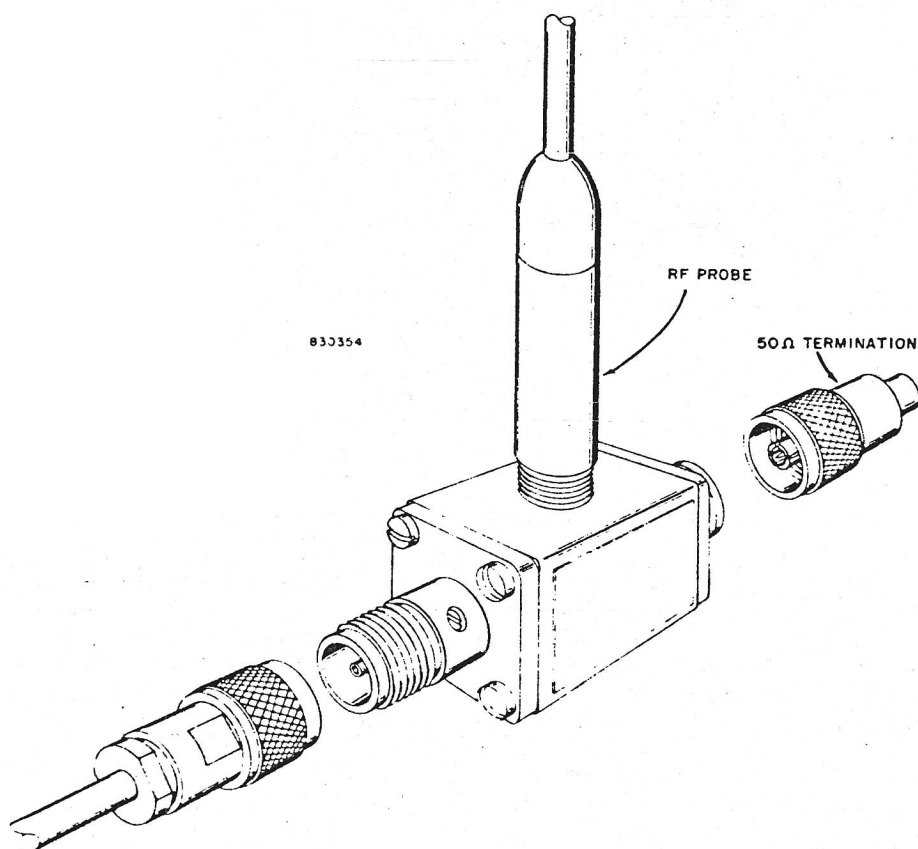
Assembly of Model 91-14A Type N Tee Adapter
